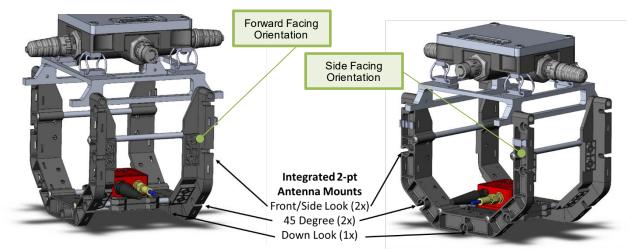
Mounting Locations on the Antenna Mounting Frame
